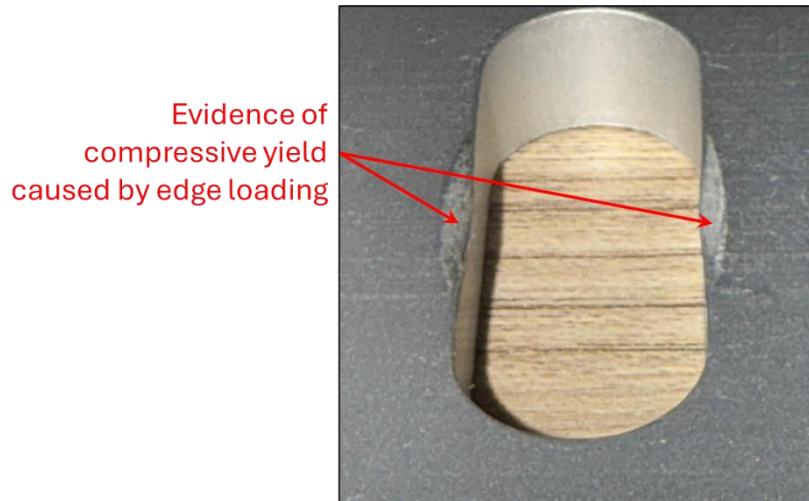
Evidence of compressive yield at the edge of a slot due to bending of a thin washer.
